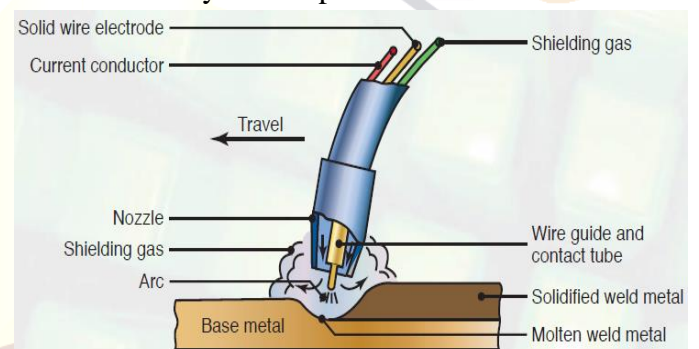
Schematic Diagram of GMAW Welding System
